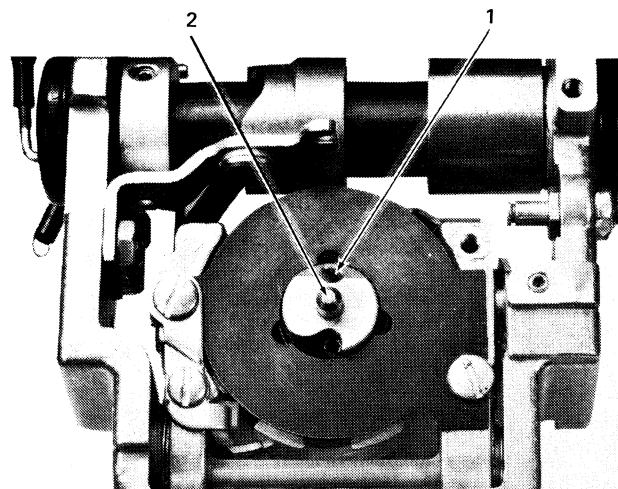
Lower Ball Socket and Tilt Ring Removal
